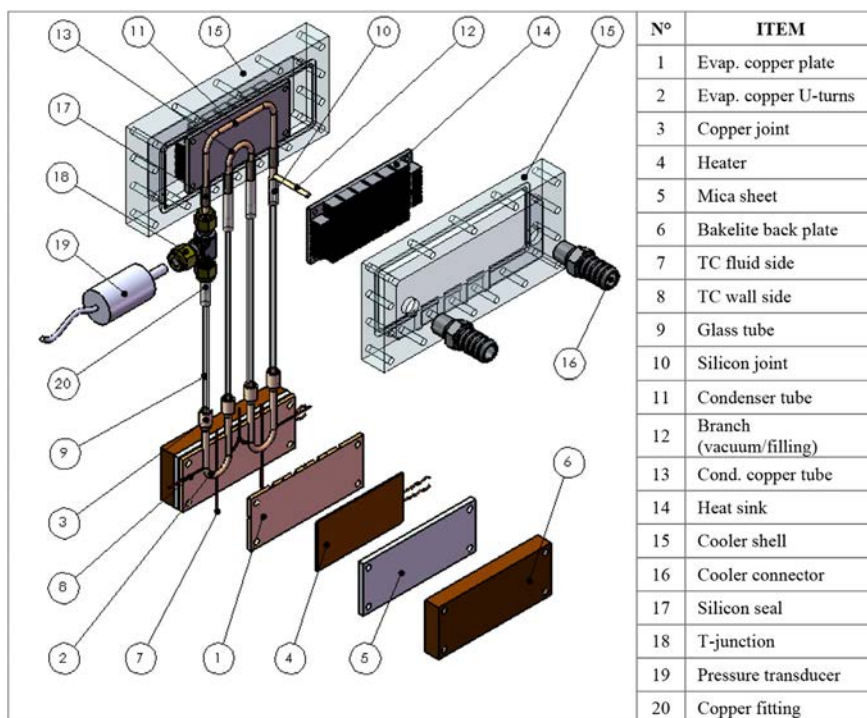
Exploded view of the Closed Loop Pulsating Heat Pipe test-cell.
